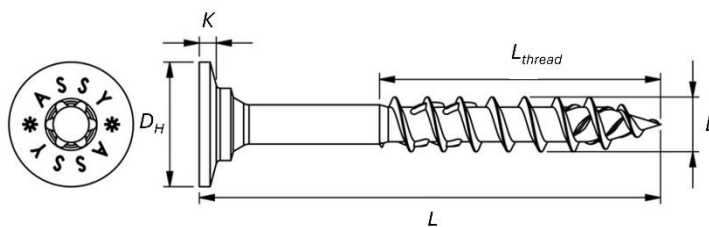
ASSY 4 SCREW WITH FLAT WASHER HEAD (WH II)
